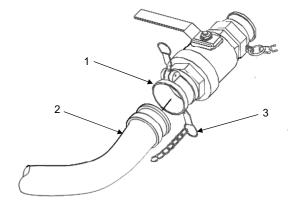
Drain Ball Valve Assembly with Drain Hose.
